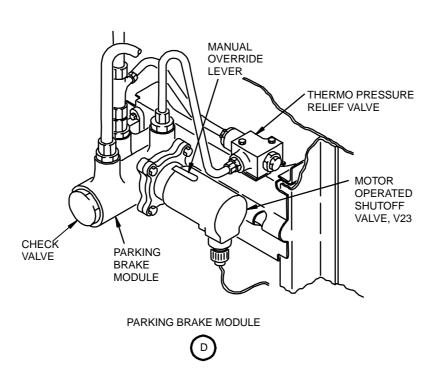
32-44 Parking Brake Sys. Comp. Location Fig. 102 (Sheet 1)
